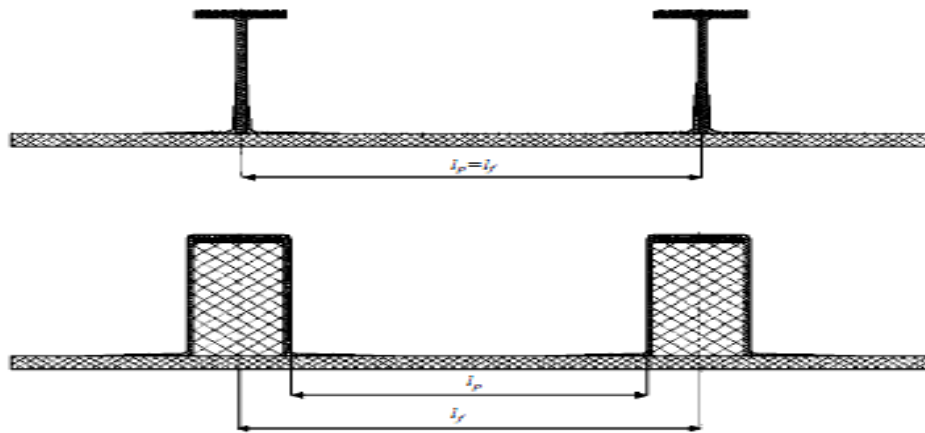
Determination of the supporting contour length with framing members of different sections:
